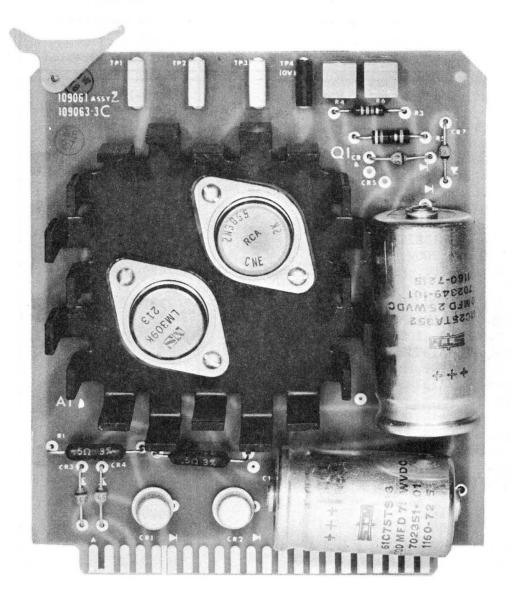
Step Motor Power Supply Card 109061-2 Assembly.
